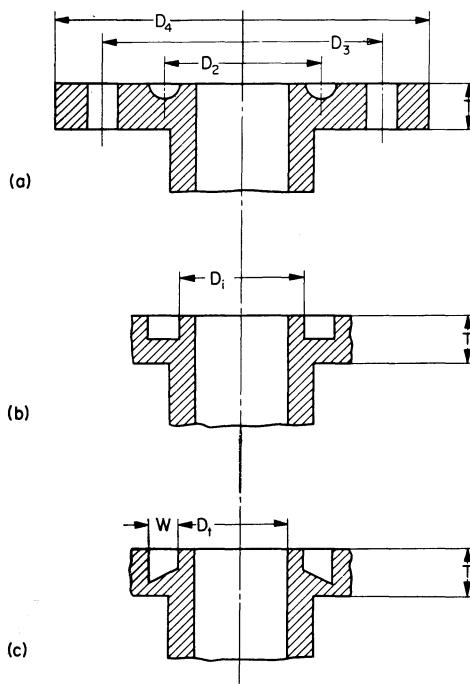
Dimensions of flanges (Table 3.30) with (a) groove of semi-circular cross section; (b) groove of rectangular cross section; (c) groove of trapezium cross section
